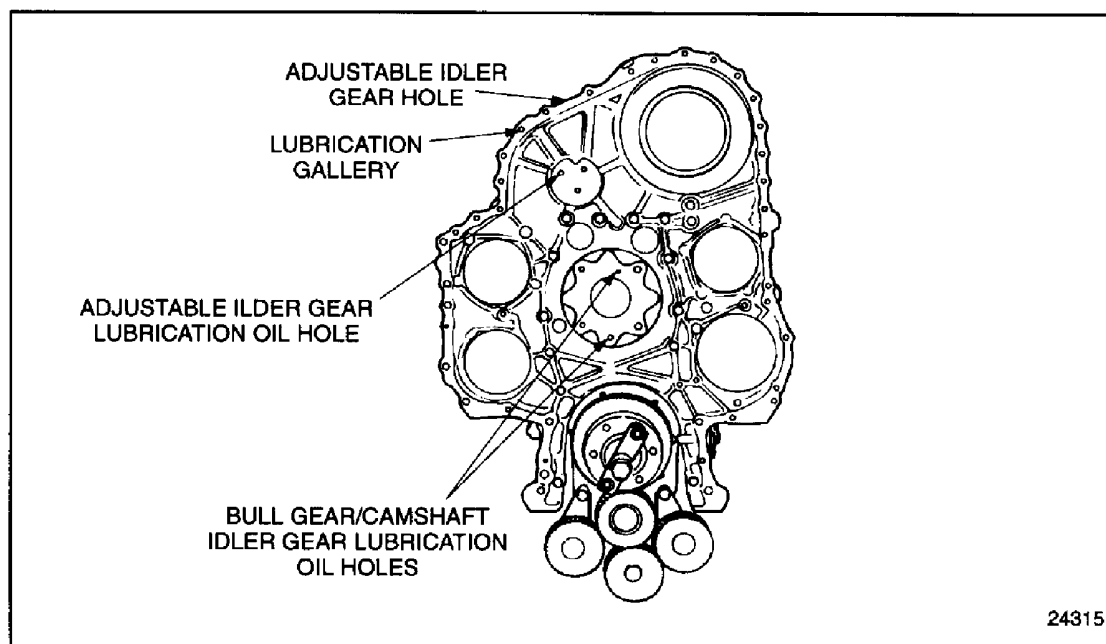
Bull Gear and Camshaft Idler Gear Lubricating Oil Hole Locations
